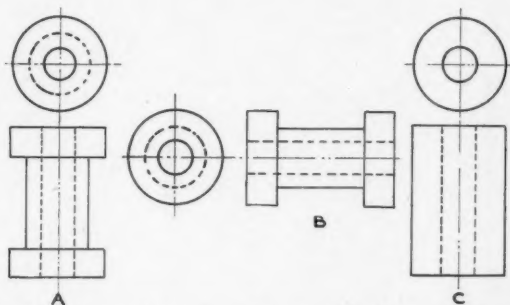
SIMPLE BRONZE CYLINDRICAL BUSHING. A: PROBABLE CASTING POSITION, WITH SHRINK ON TOP OF FLANGE. SOME SHRINKAGE IS TO BE EXPECTED IN FLANGE. B: IF LARGE AMOUNT OF METAL IS REMOVED IN MACHINING, THIS WOULD BE PREFERRED POURING POSITION, AS COMPARED WITH A. IN POSITION B, HEADS WOULD BE LOCATED ON TOP OF BOTH FLANGES. C: PREFERRED DESIGN FOR BUSHING TO BE POURED OF A HIGH-SHRINKAGE BRASS OR MANGANESE BRONZE.
